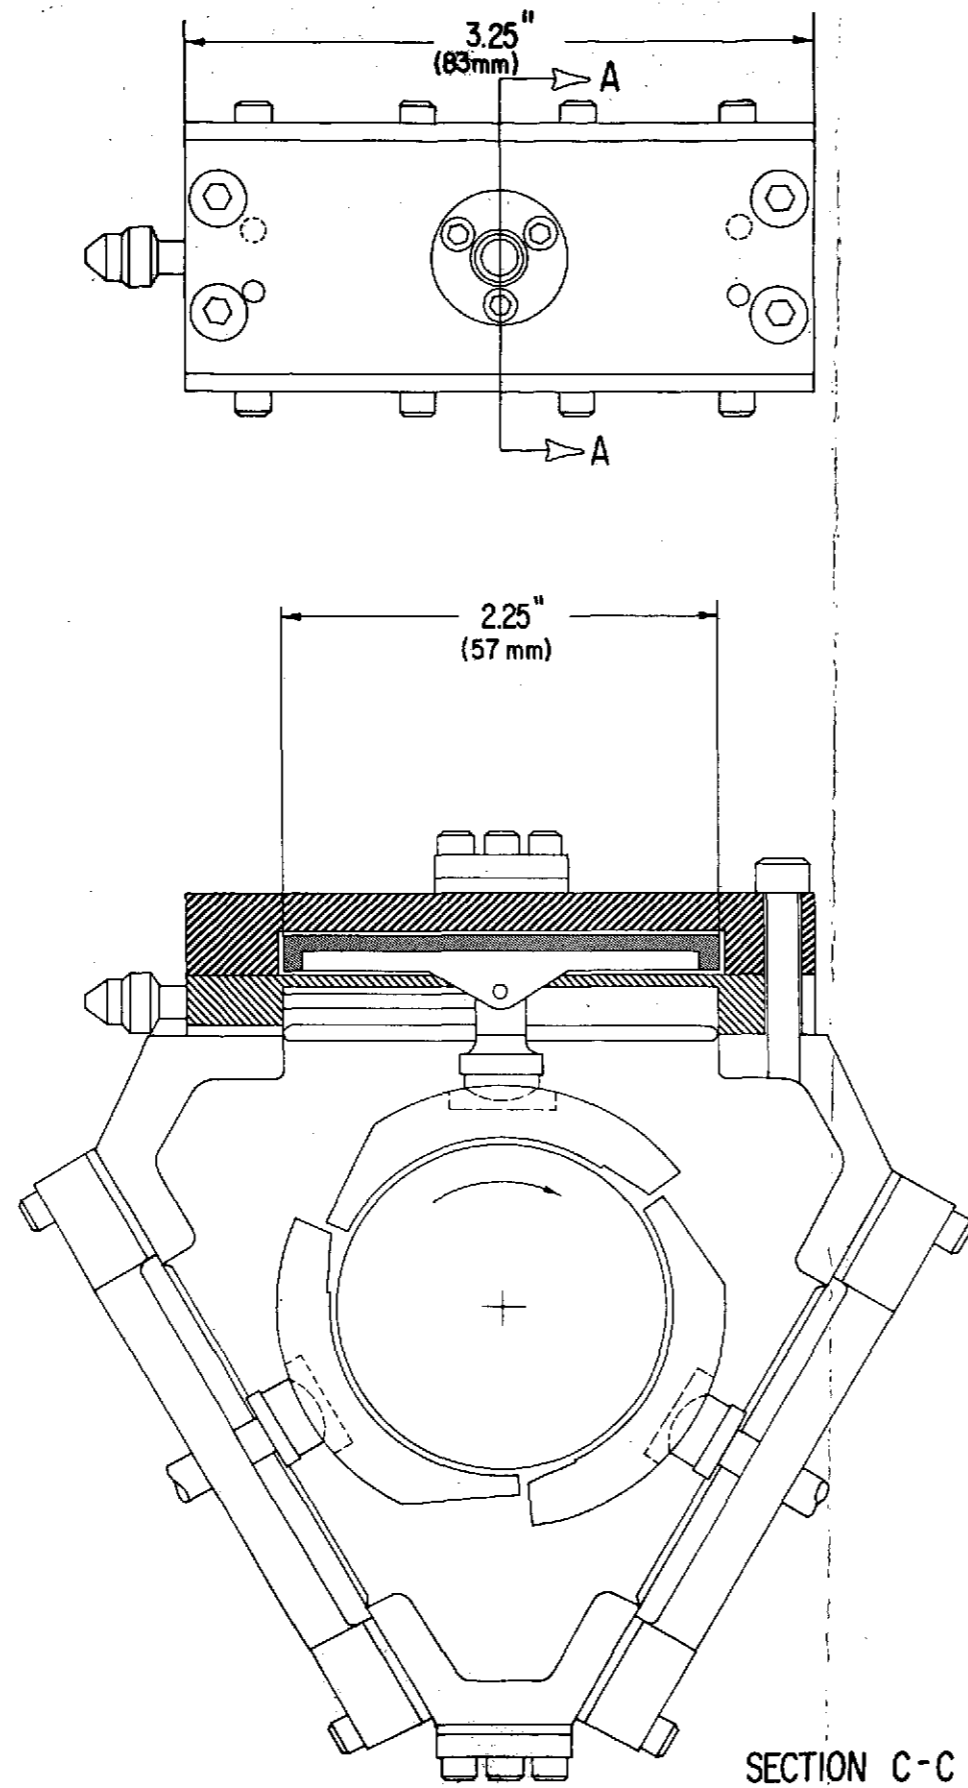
BRU Journal Bearing Flexure Assembly And Damper Elements
